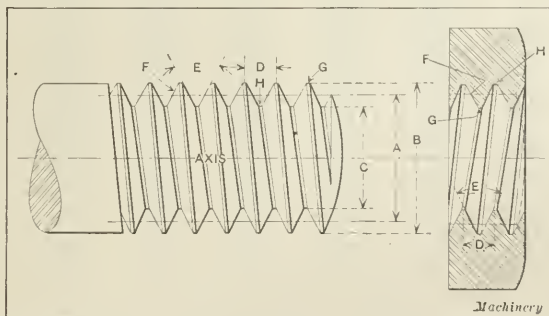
Diagram illustrating Various Elements of a Screw Thread
